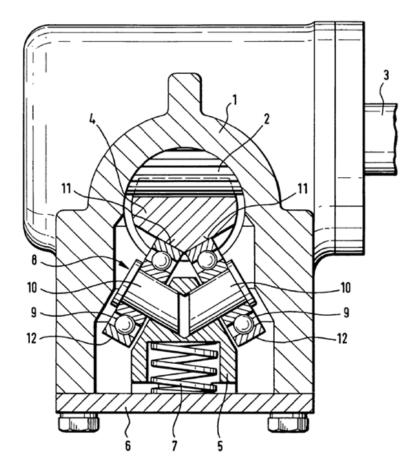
illustrates a rack and pinion gearing including a rack (4) which is biased against a pinion gear (2) by a pressure yoke (5) and a spring (7). Roller bearings (9) reduce friction on rack (4).
